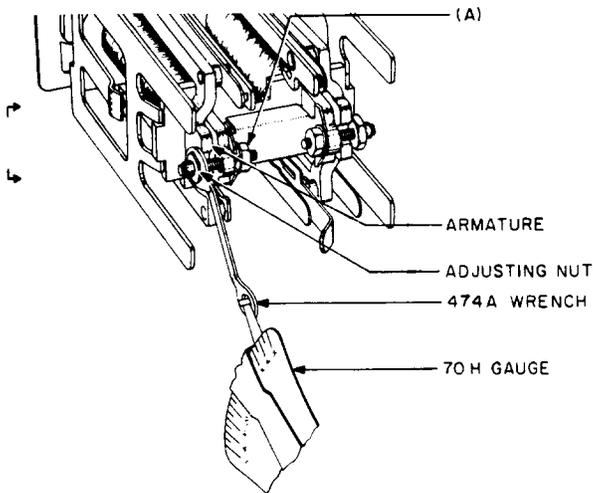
Method of Checking Tightness of Adjusting Nut
